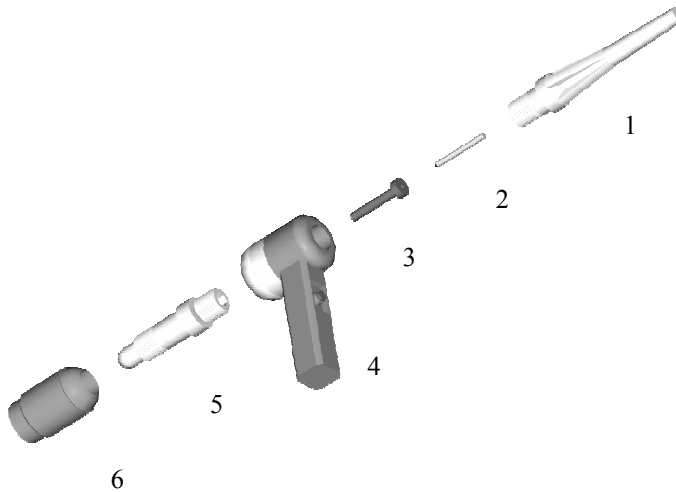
Exploded view of a torch: back cap – 1; electrode – 2; collet – 3; handle – 4; collet body – 5; nozzle – 6
